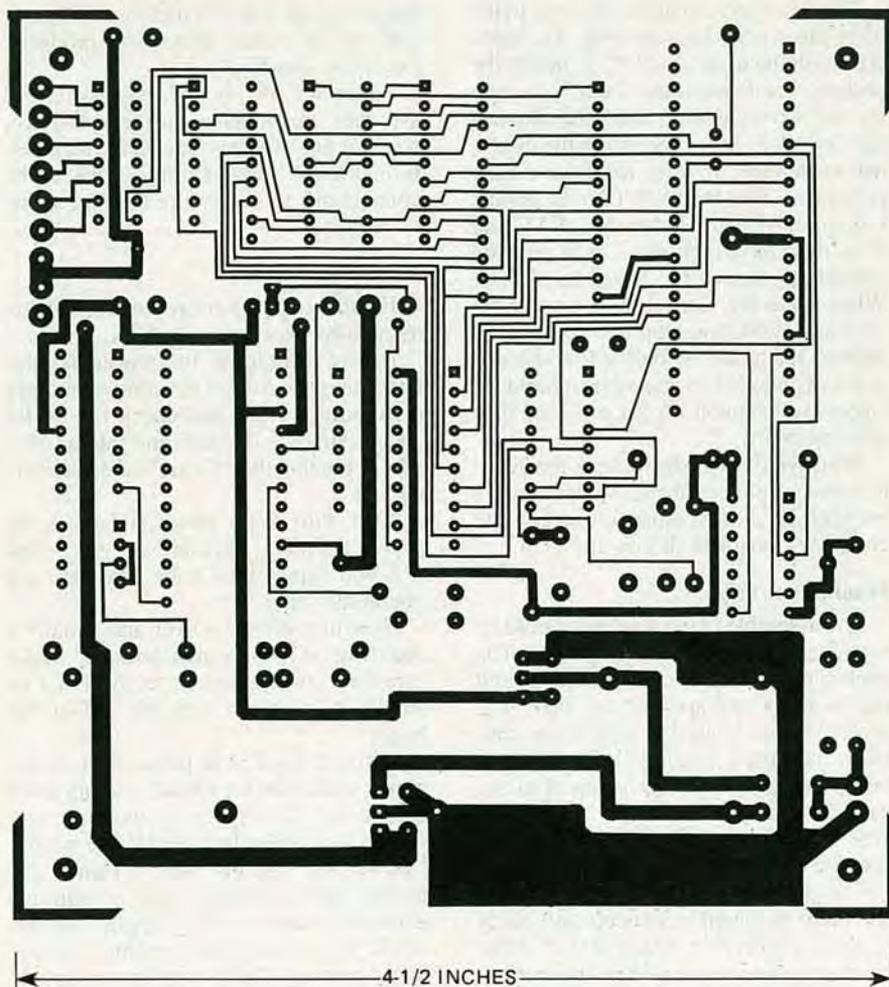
"FOIL SIDE" of clock board. Double-sided board uses plated-through holes and can be ordered from supplier indicated in Parts List.
